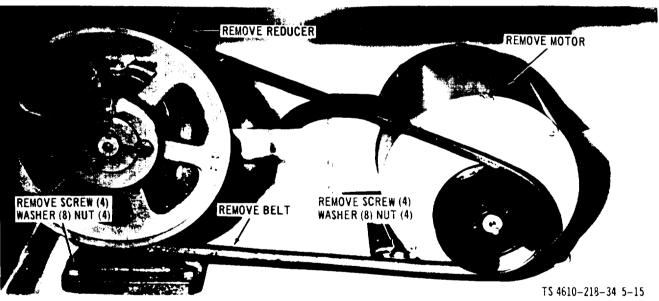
Slurry Feeder Drive Motor, Speed Reducer and Belt, Removal and Installation
